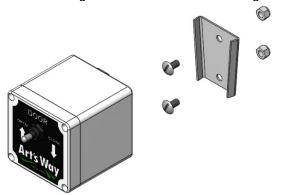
Tractor Hydraulics Actuator Control Box and Mounting Parts.
